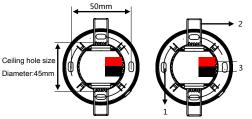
Dimensions - Back View Figure 5. Components - Back View
